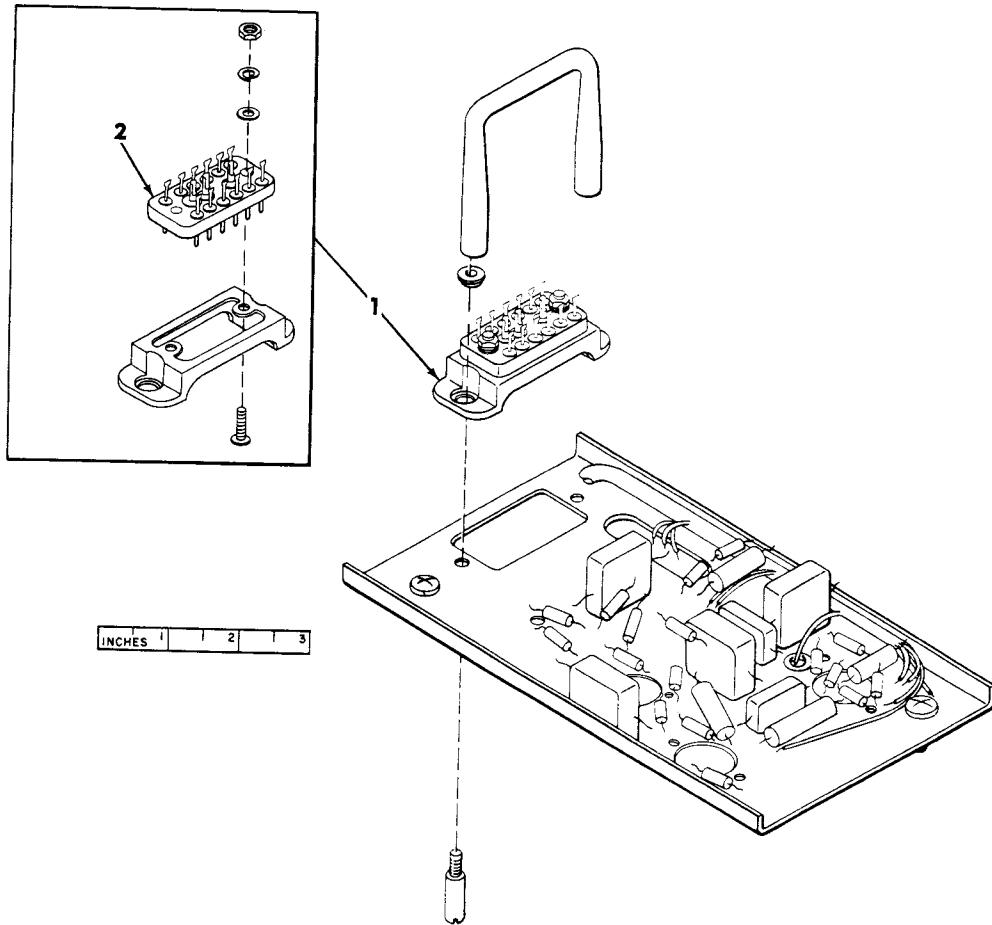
Switch assembly, telephone connecting (9005424)—exploded view
